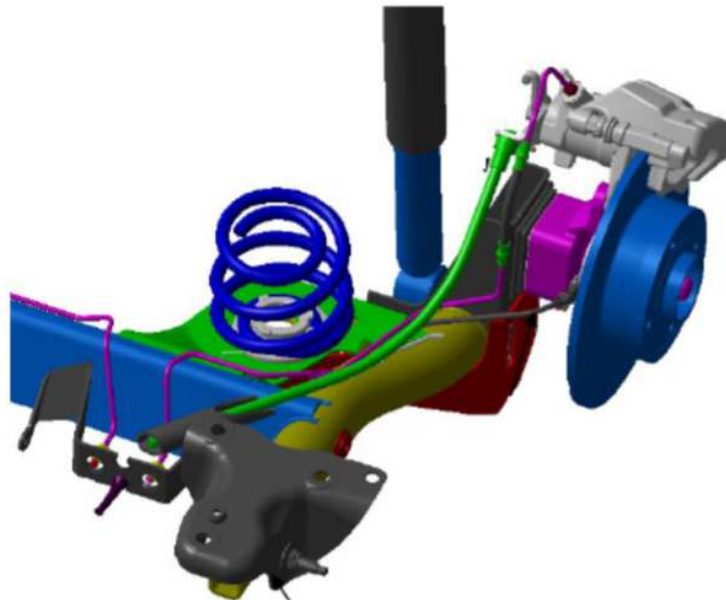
CAD drawing of the rear suspension with the spindle in violet [13].
